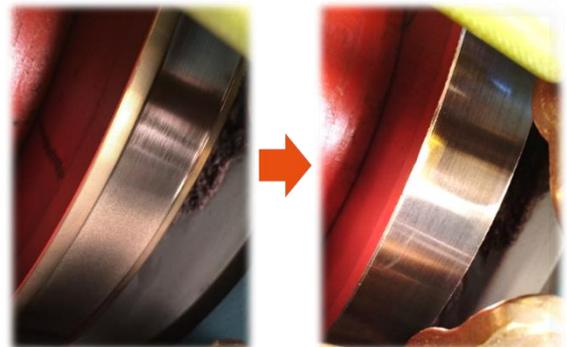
Mersen Hitachi Lathe and machining of ground ring. Before (Left) and After (Right)
